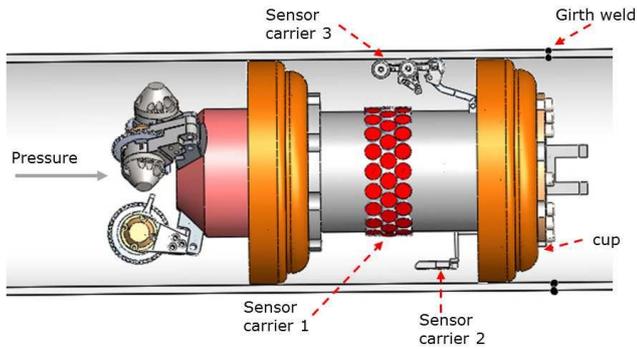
Pipeline inspection gauge capsule with different types of sensor carriers mounted [21]
